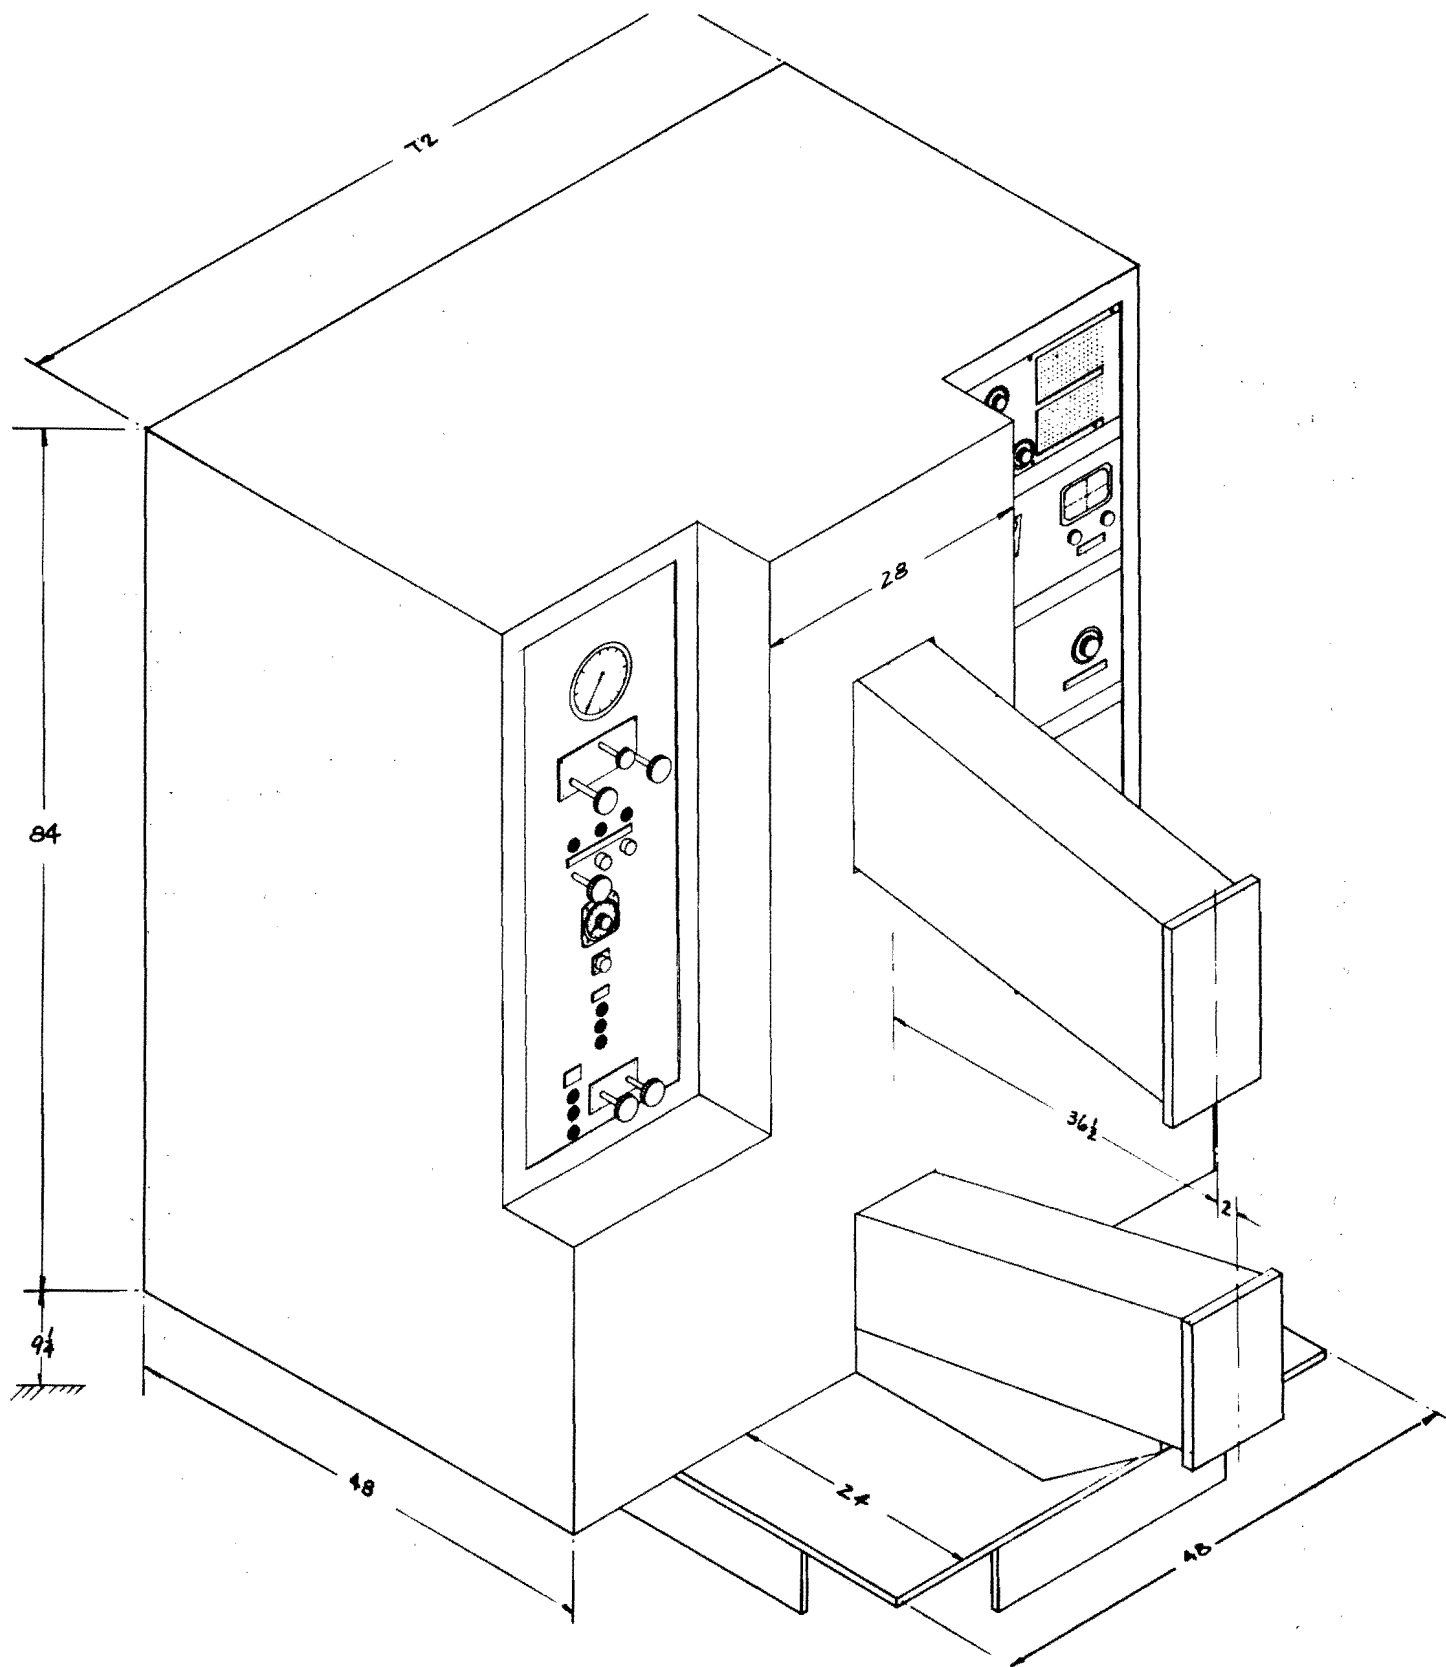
Instrument and Cabinet Arrangement for 25-Kilowatt Welding Unit
